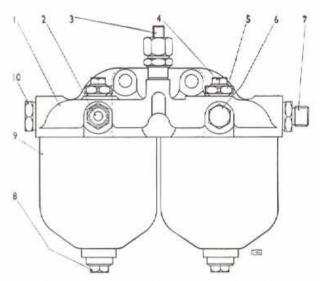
Arrangement of fuel filter (C.A.V.)-twin paper element type.
